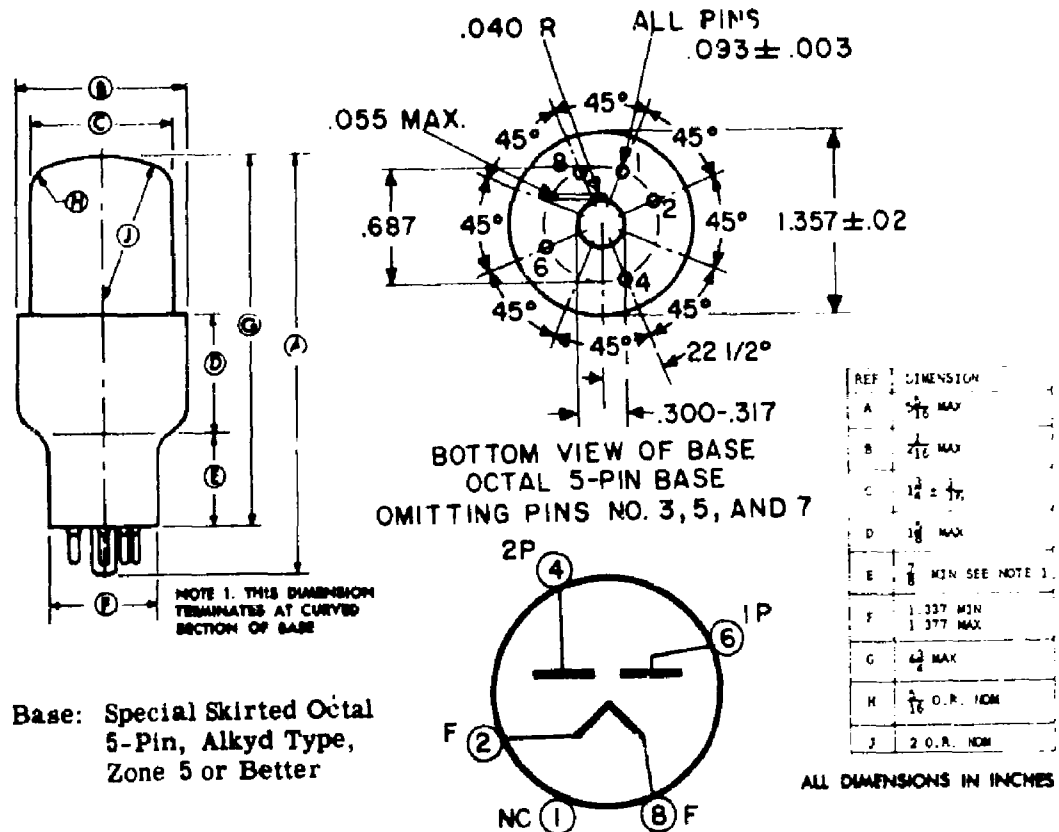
Outline Drawing and Base Diagram of Tube Type JAN-5R4WGA
